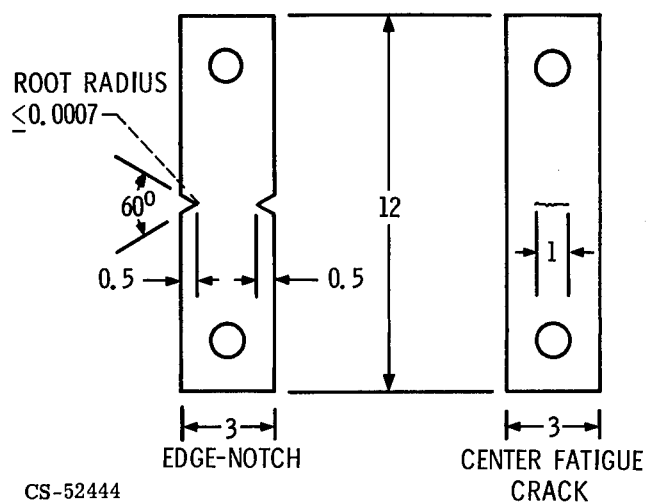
ASTM specimens for sharp-notch testing of high-strength sheet materials (ref. 3).
